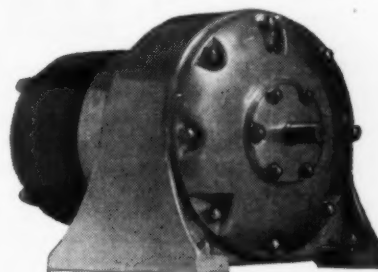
Original Construction of gear motor housing. Required 90% more machining. Weighed 175% more than welded steel.
